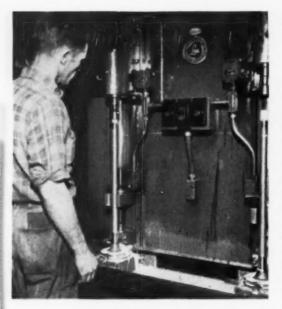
Drill setup in which the large flange hole of axle shaft is counterbored and chamfered.
